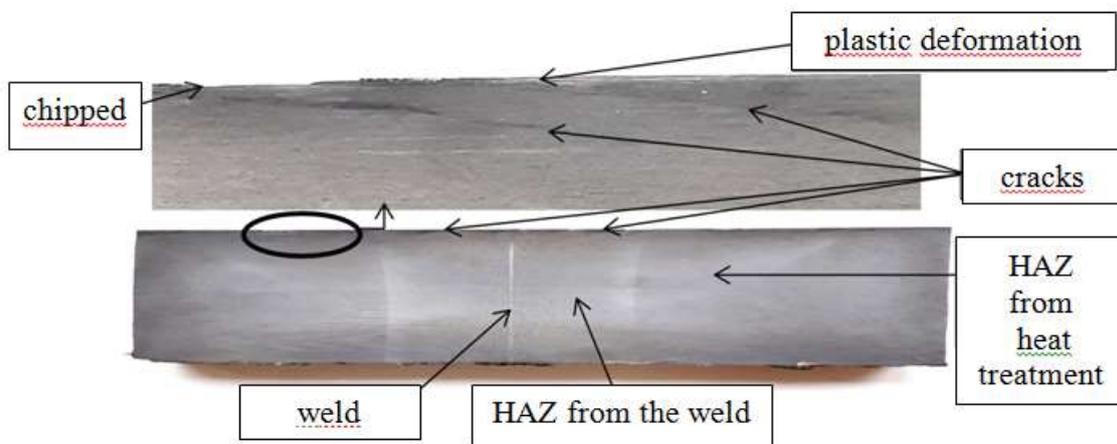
Macrostructure of contact-welded joint of rails.
